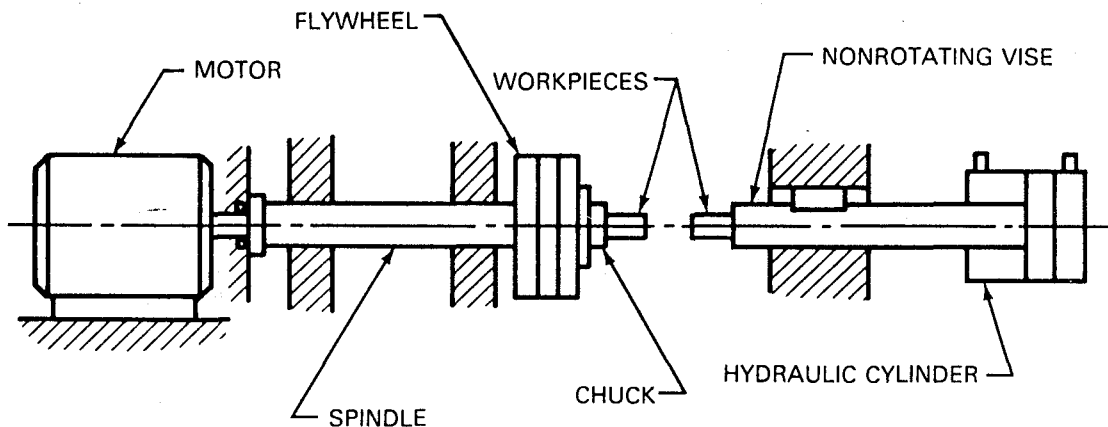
Basic Arrangement of an Inertia Welding Machine
